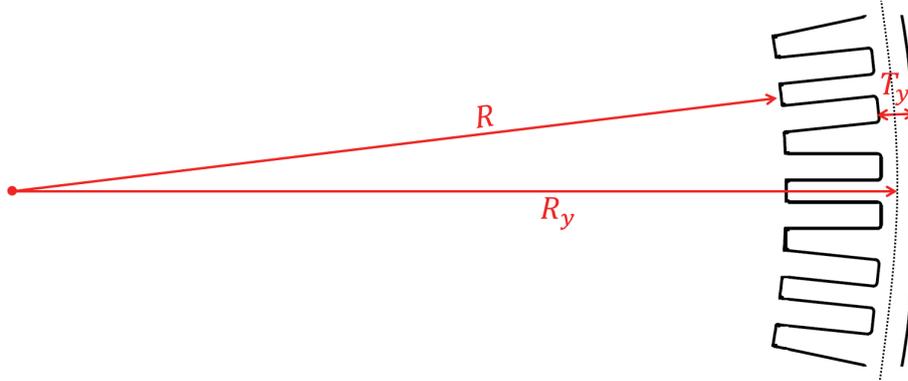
Stator of the prototype 120-slot/116-pole PM machine.
